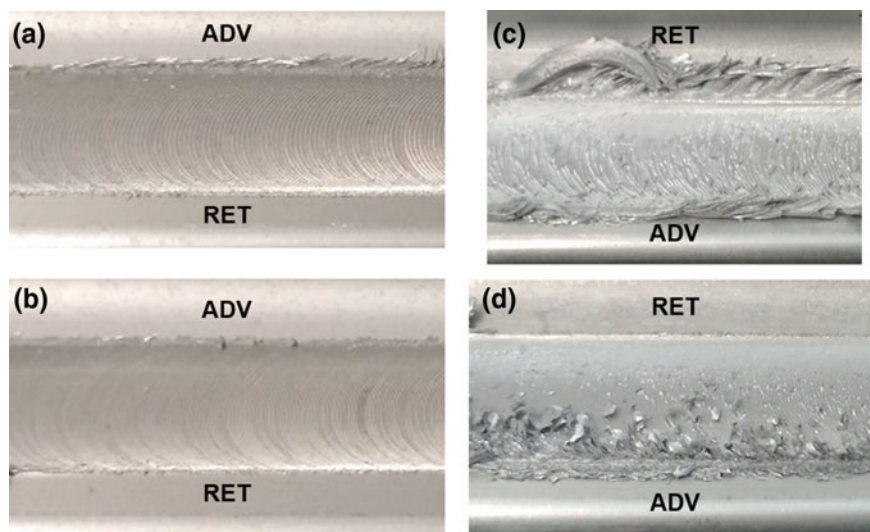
Close-up images showing the surface quality of welds performed by a tool with three flats at 800 rpm and 250 mm/min; b tool with three flats at 1200 rpm and 250 mm/min; c conventional threaded tool at 800 rpm and 250 mm/min; d conventional threaded tool at 1200 rpm and 250 mm/min
